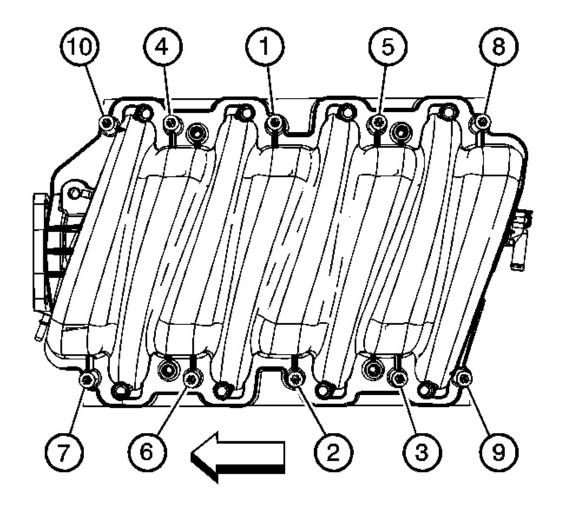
Intake Manifold Courtesy of GENERAL MOTORS CORP.
